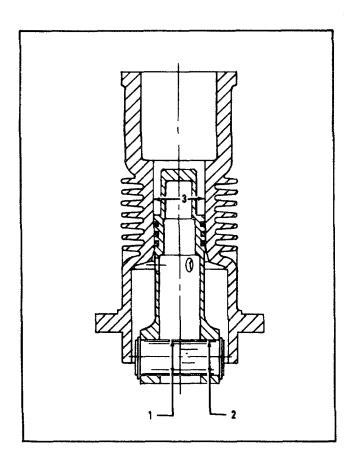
Third Stage Cylinder, Piston and Pin Assy
